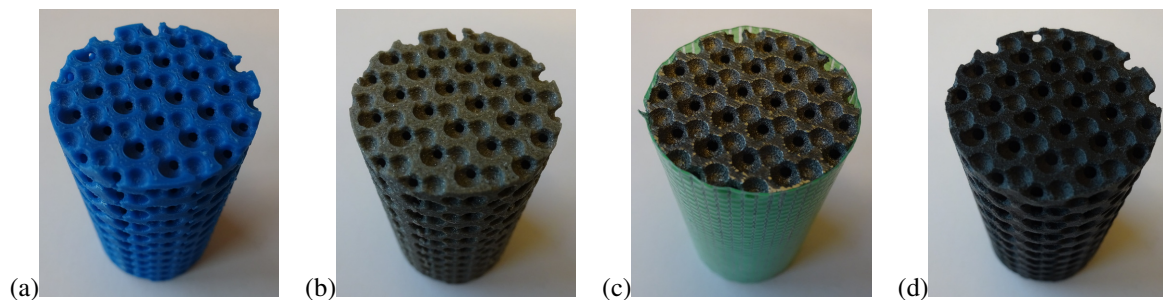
FPC samples (height 50mm) for 29mm impedance tube, fabricated using various Additive Manufacturing Technologies and *3D-printers*: (a) FDM – *Zortrax M200*, (b) FDM – *FlashForge Creator PRO*, (c) DMLS – *EOSINT M280* (aluminium sample wrapped in tape), (d) SLS – *Sinterit Lisa*.
